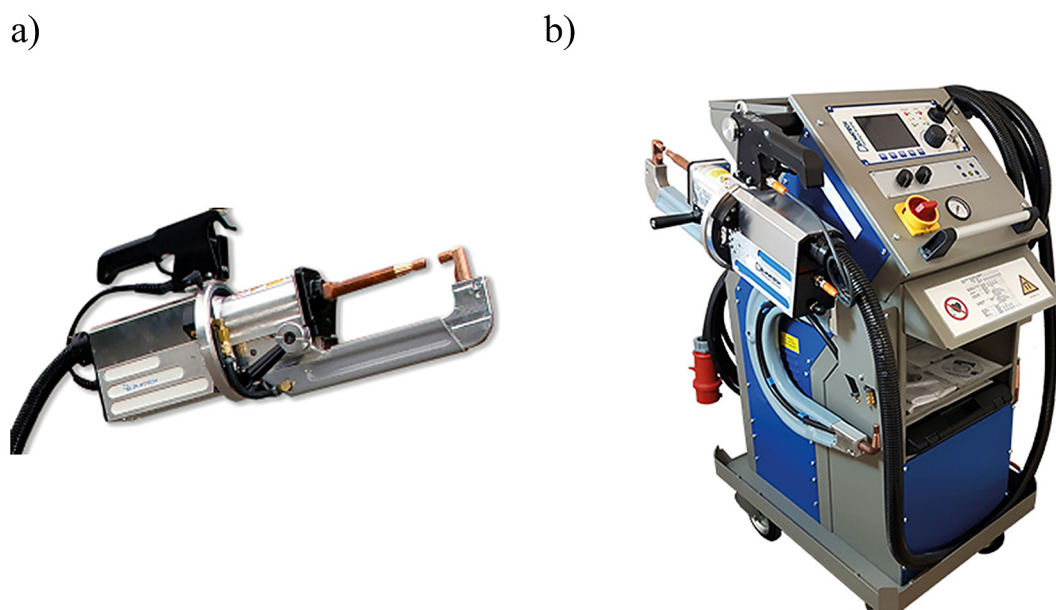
Test setup with the ELMA-Tech GmbH resistance spot welder MIDISpot Vision AV, (a) view of the welding head with electrodes and (b) overview of the complete system with individual components
